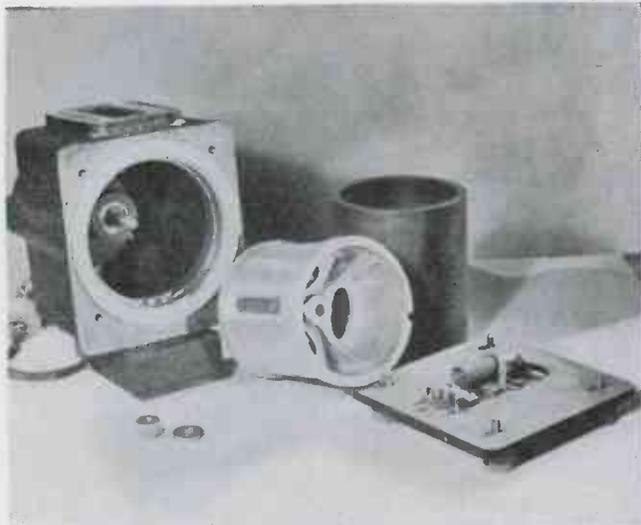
Film drum attachment showing housing and the dark shield which permits the loaded drum to be handled in daylight, at the rear, the drum and cover in front. Drum is rotated by synchronous motor integral with housing
